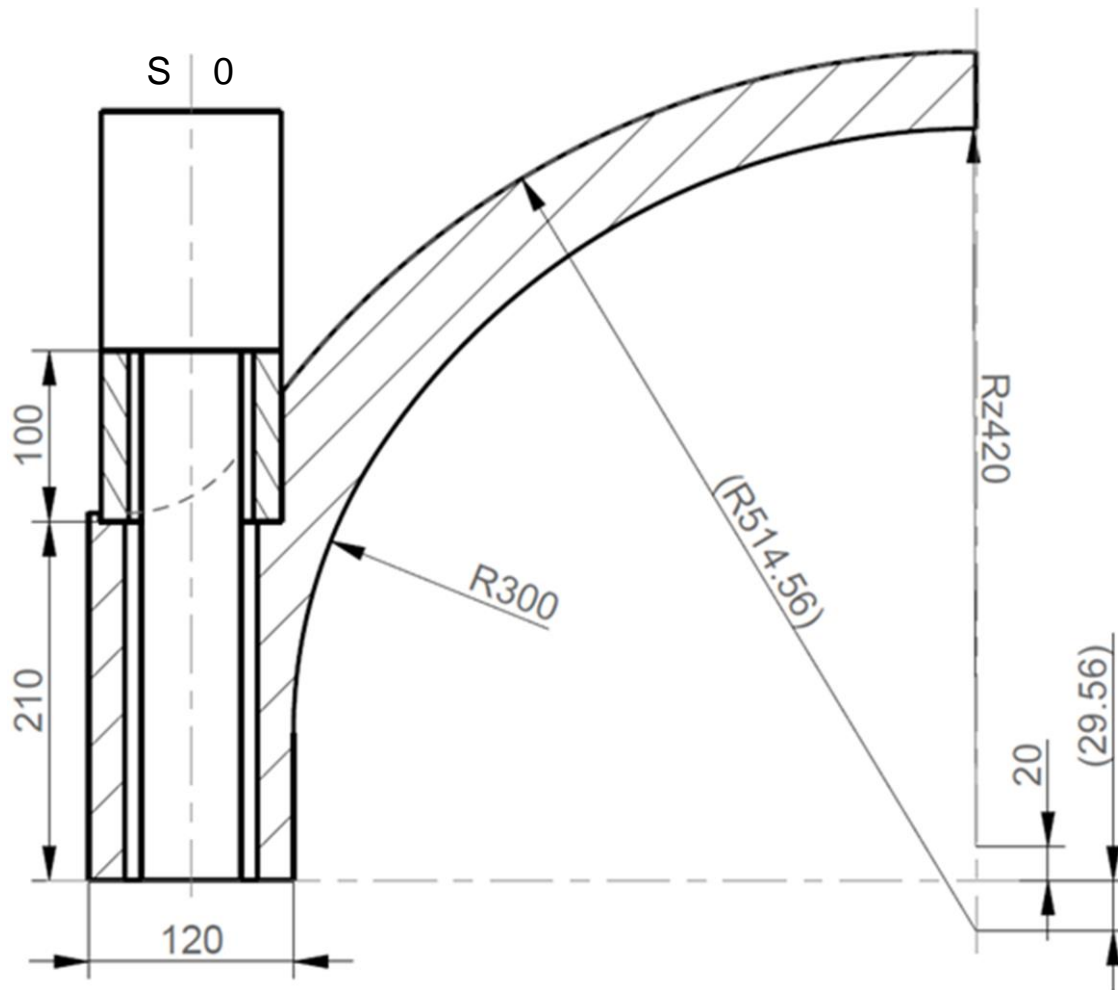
Partial dimensioning of model narrow-flange of model class II.
